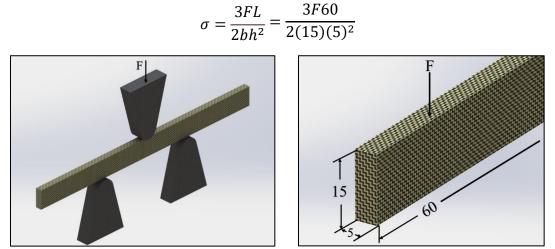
Flexural test specimen according to ASTM D7264, Test mode 2, implant 90° rotation. (a) Test configuration. (b) Flexural specimen Dimensions.
